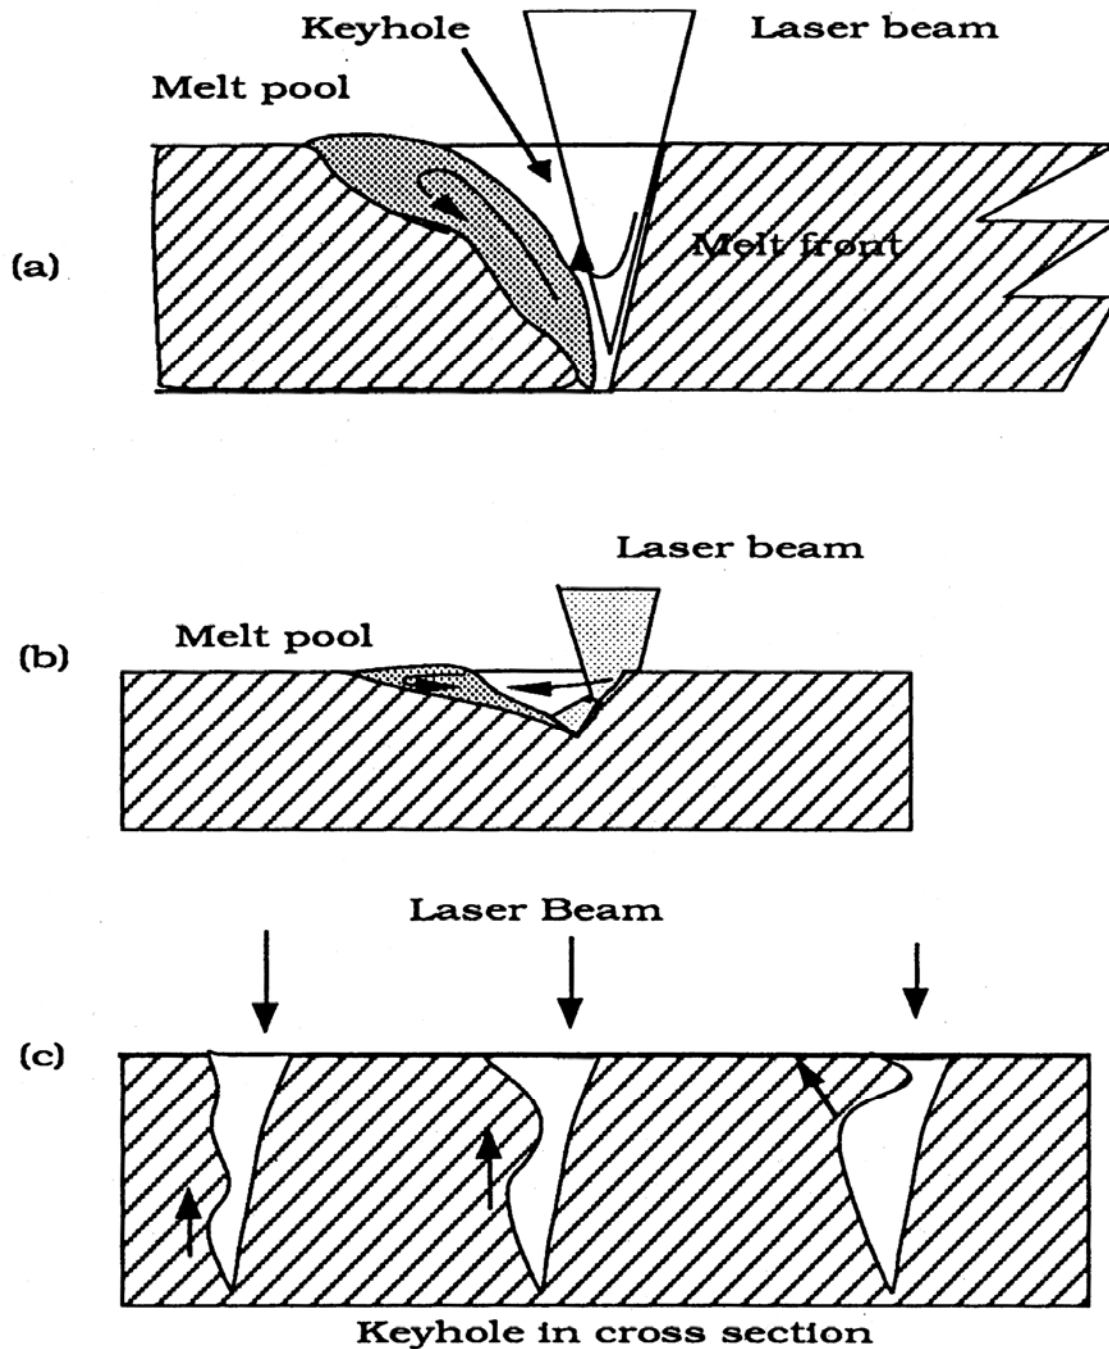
Approximate shape and flow pattern in laser welds.
